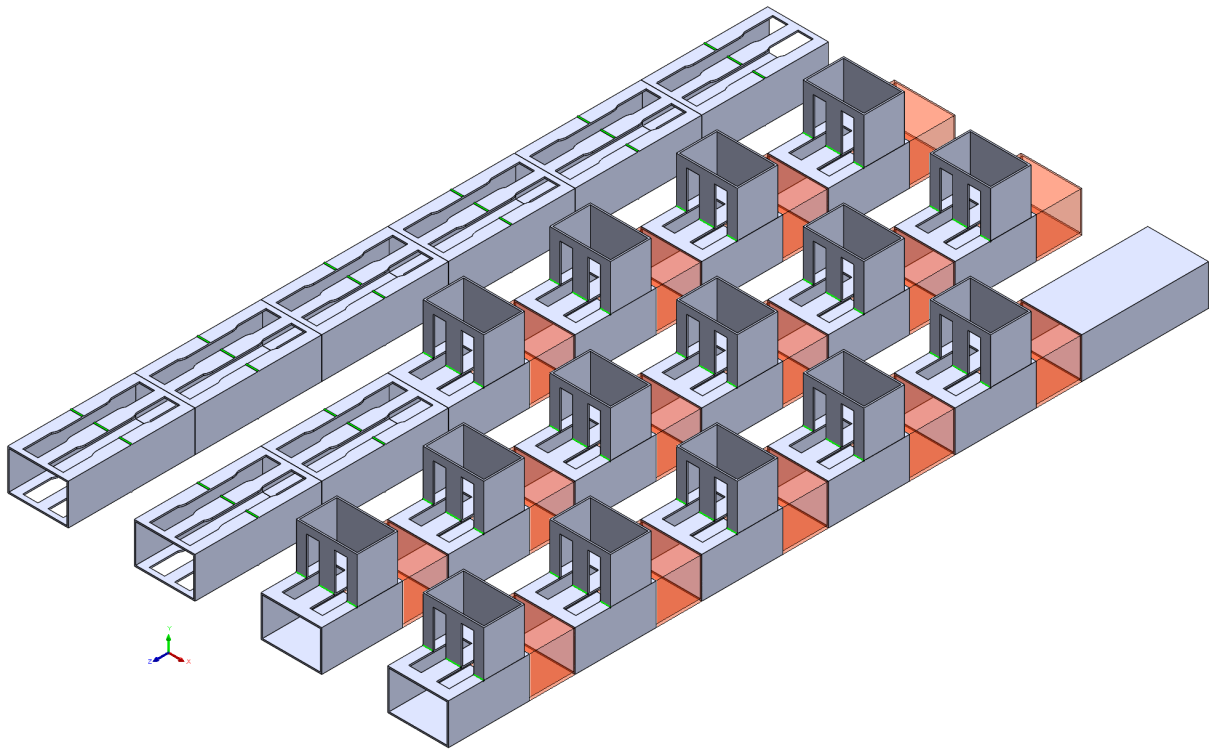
Manufacturing layout of the extruded 6060-T66 aluminum profiles
